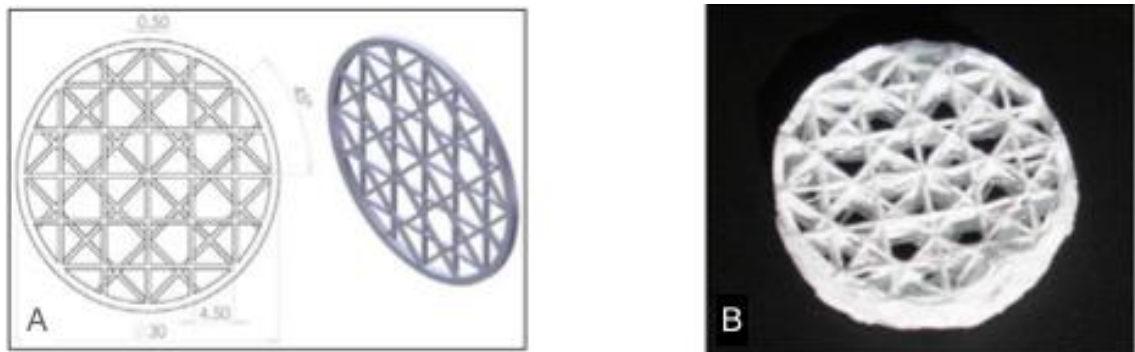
SLA built ceramic prototype for bone tissue engineering (A) CAD model (B) Sintered prototype
